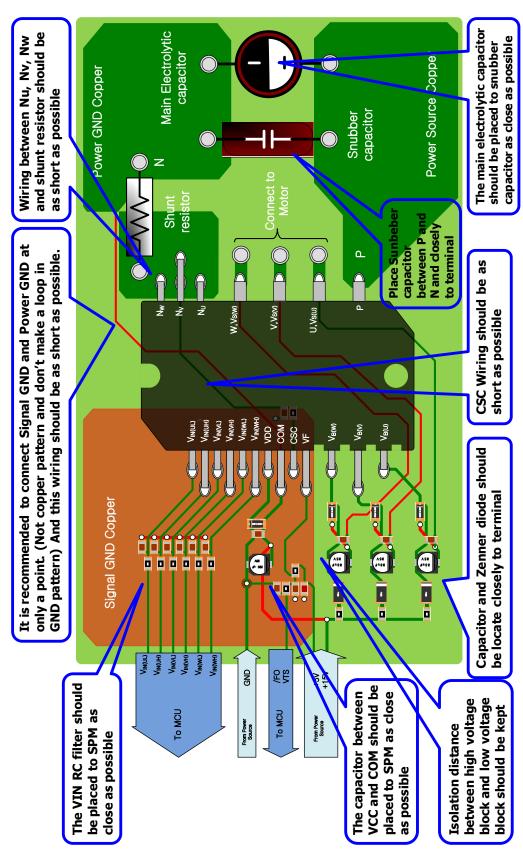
Print Circuit Board (PCB) Layout Guidance for Motion SPM 55
